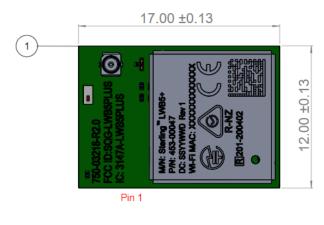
Module dimension of LWB5+ series wireless module - Top View
